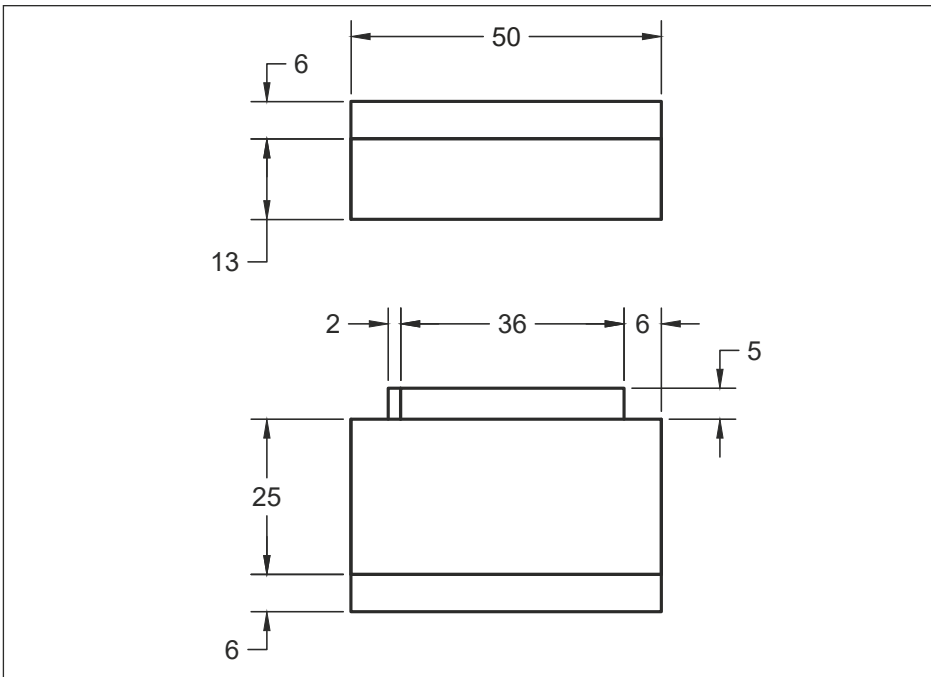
Top/bottom, sides and liner pieces laid out flat with rough dimensions
